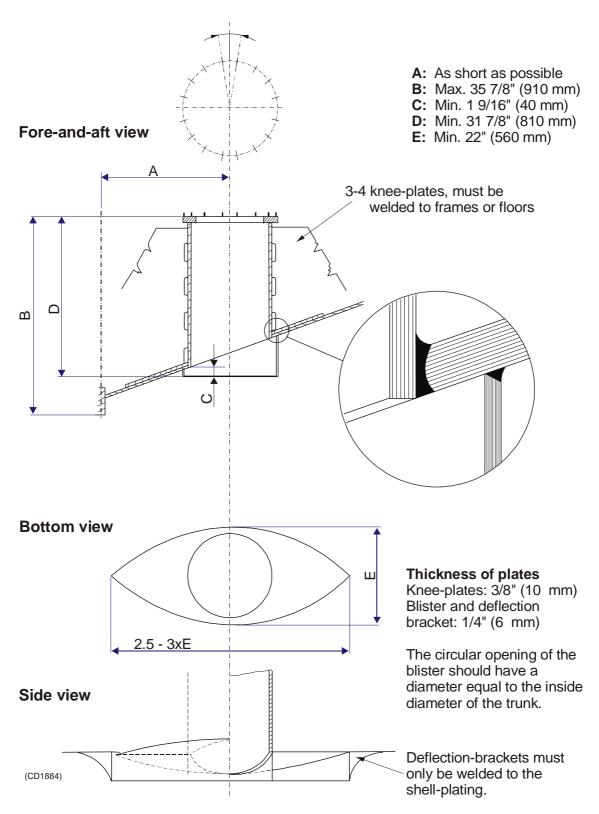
Installation of the trunk with open protection blister. No trunk extension
